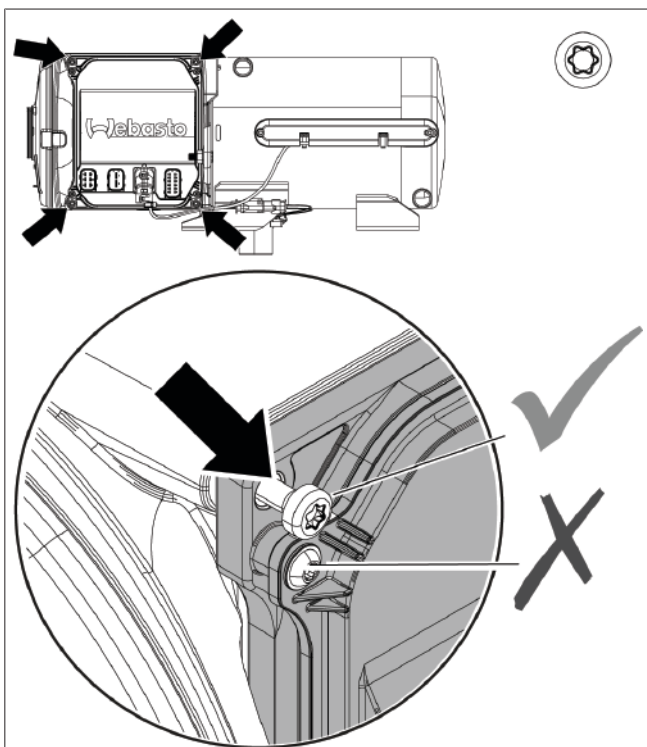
Remove screws of control unit housing T20, do not remove T10.
